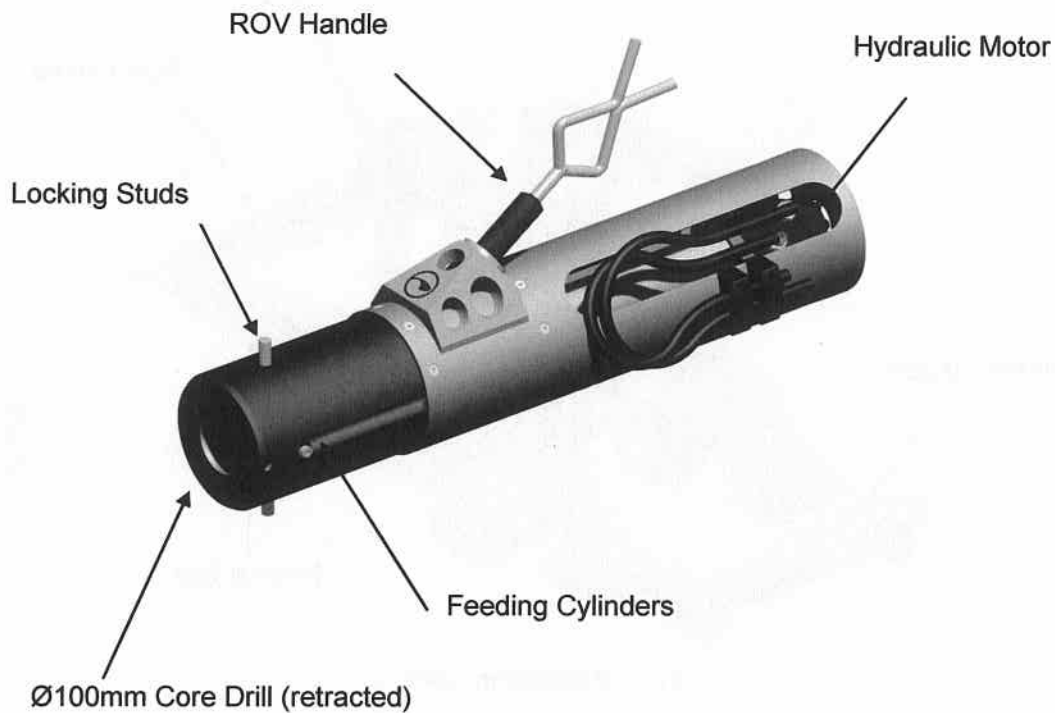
Drilling Machine with Ø100mm diamond core drill.
